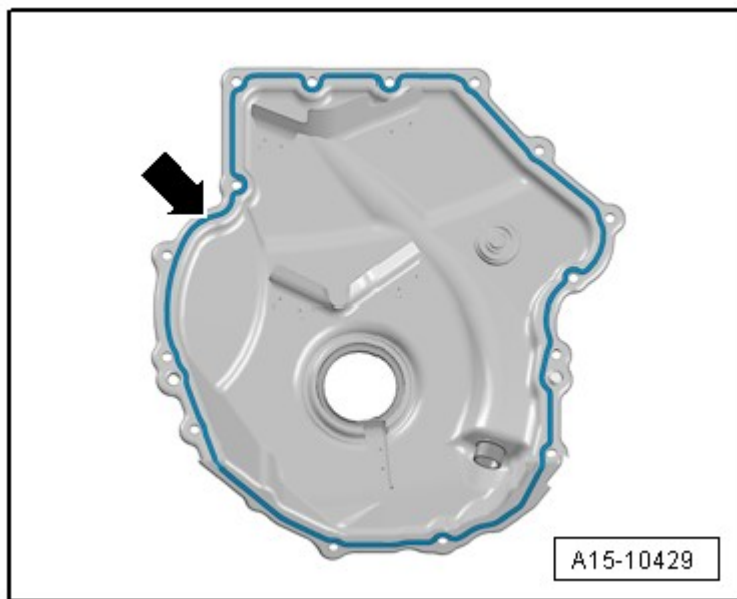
Identifying Silicone Sealant Application Area For Cover Sealing Surface
